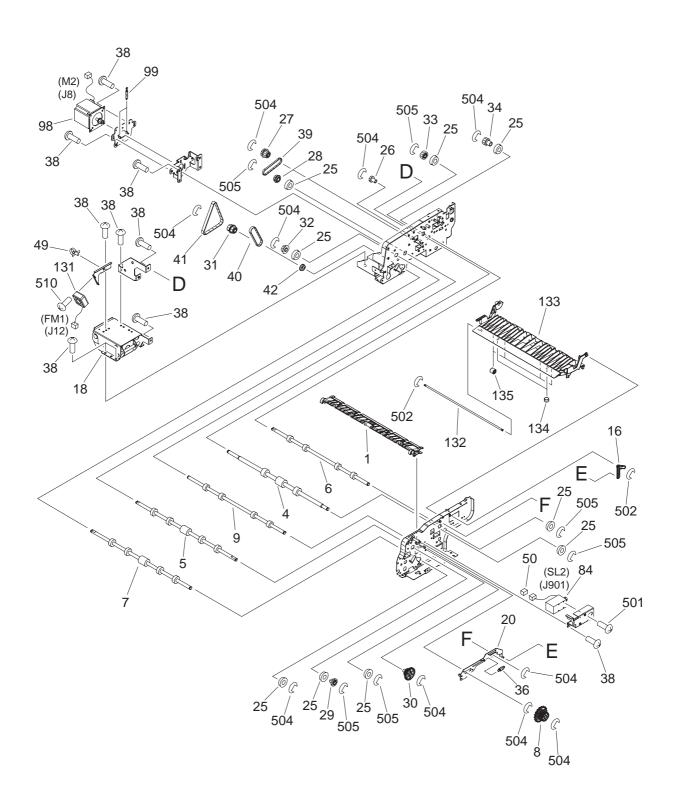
(3/3) PAPER FEEDER ASSEMBLY 搬送部
